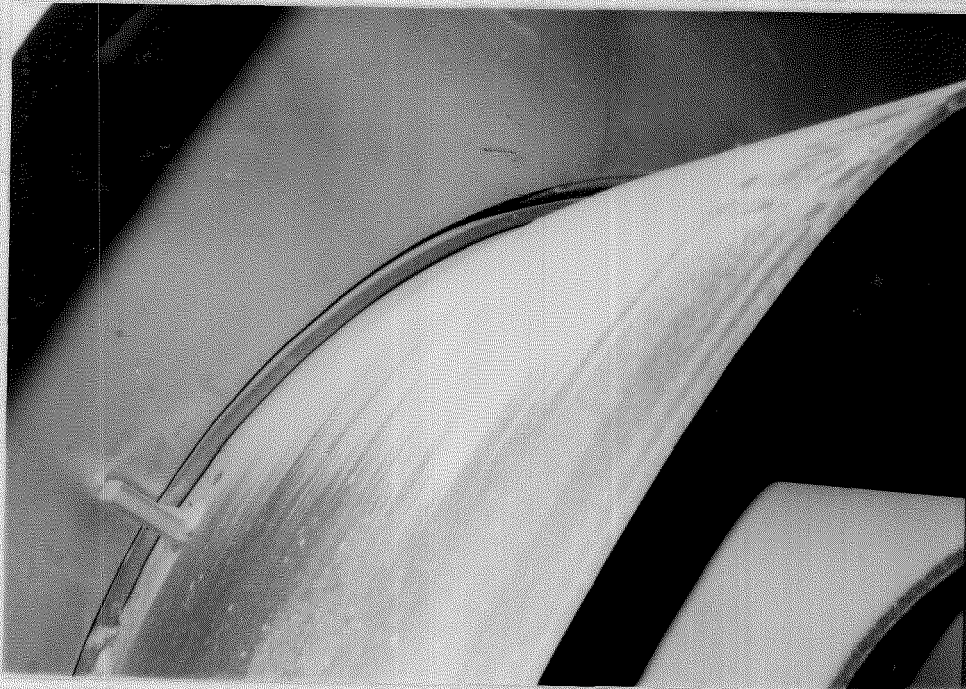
Inner air sleeve barreling or bell-outing just beyond the outer air sleeve backplate.
